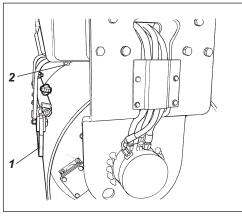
Drum 1. Scraper blade 2. Adjusting screws
